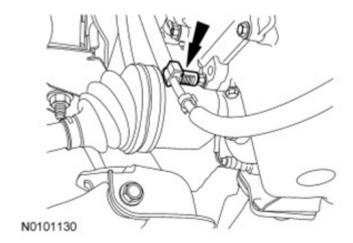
Locating Transaxle Selector Lever Cable Fastener Courtesy of FORD MOTOR CO.
